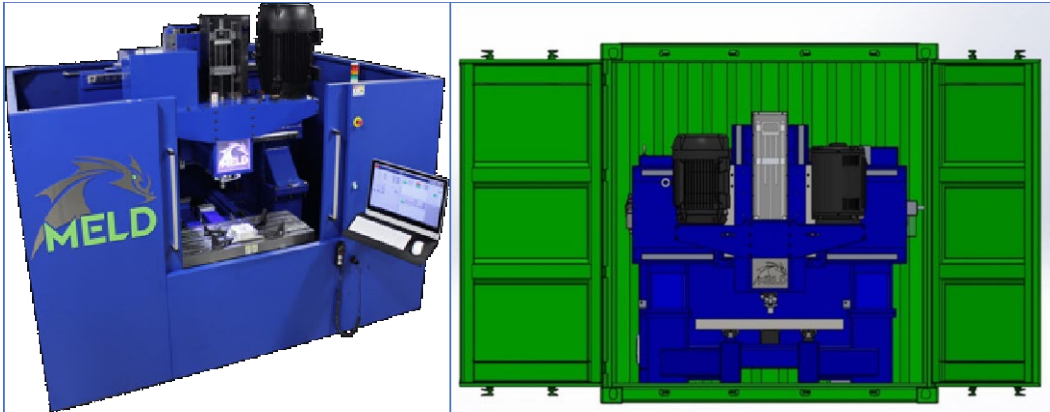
MELD B8 model machine and its fit inside an ISO container
